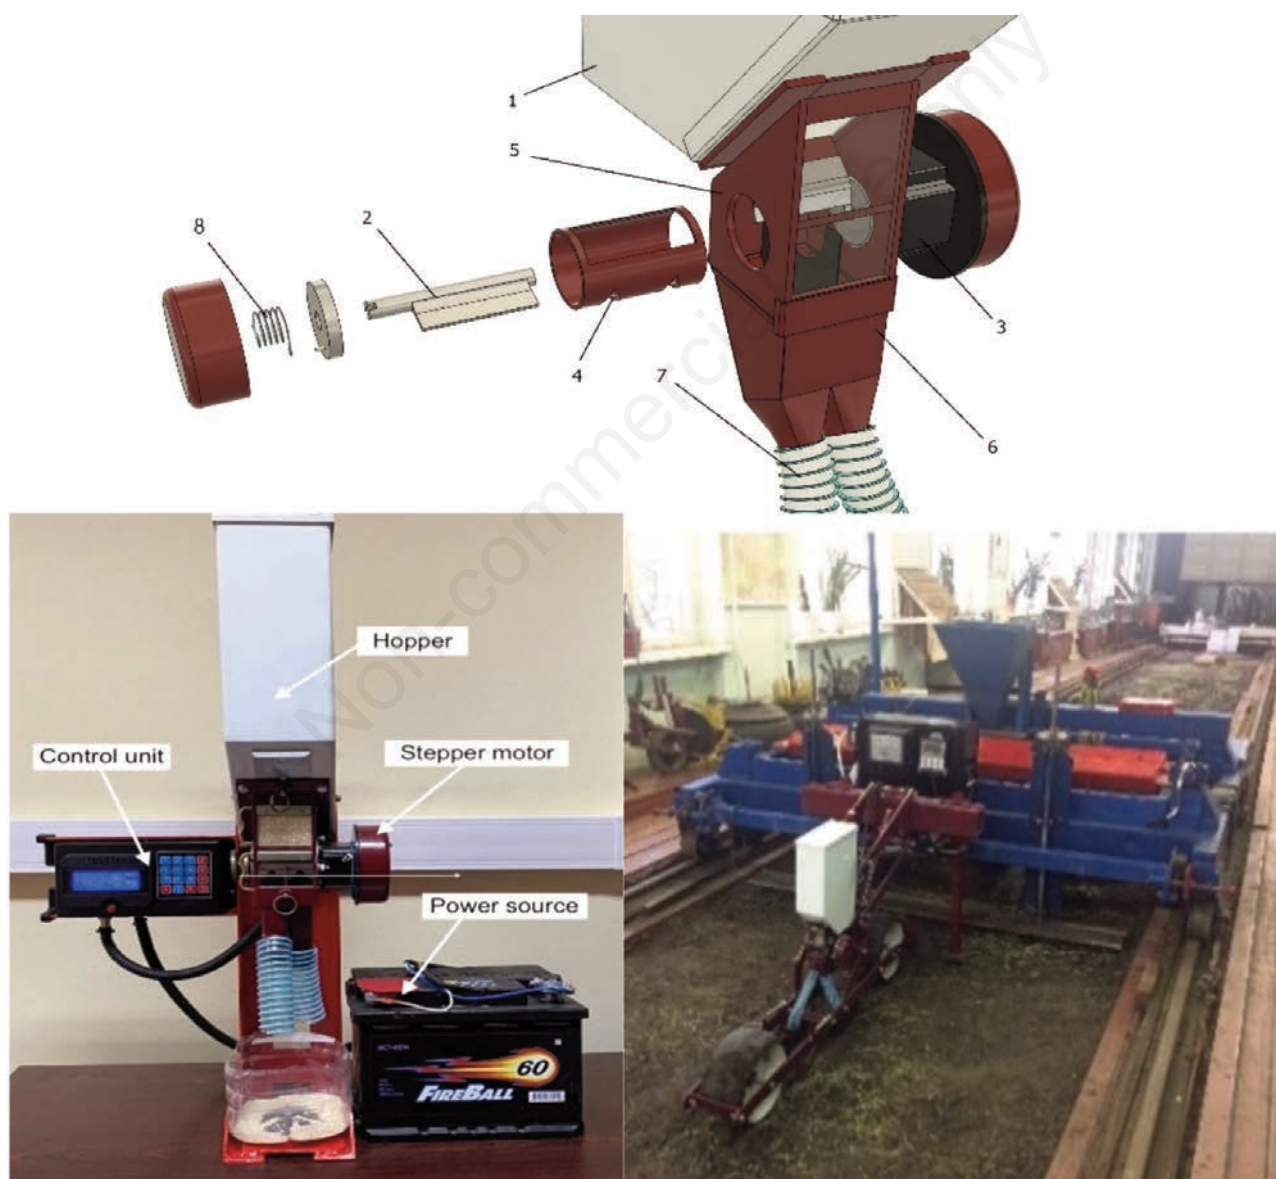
Structure, components, and tested oscillating seed metering device: 1. Seed hopper; 2. Oscillating seed plate; 3. Stepper motor; 4. Seed exit holes; 5. Metering device case; 6. Seed delivery tube; 7. Seed tube; 8. Coil spring.
